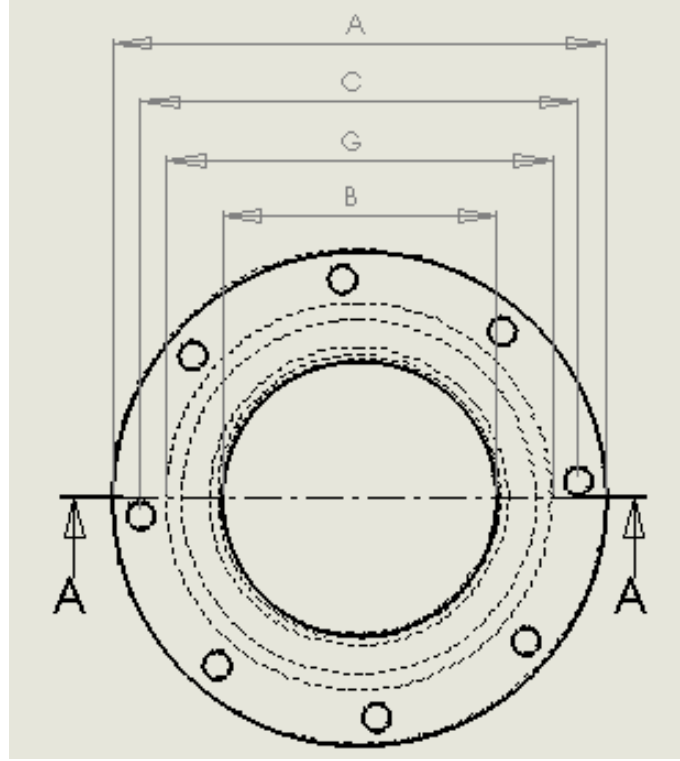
The screen holder (PT# 218) is designed to minimize the room for screens to flex inside the regenerator. The screen holder is bolted to the regenerator bottom flange (PT# 202) and tucks inside the vacuum base flange (PT# 201).
